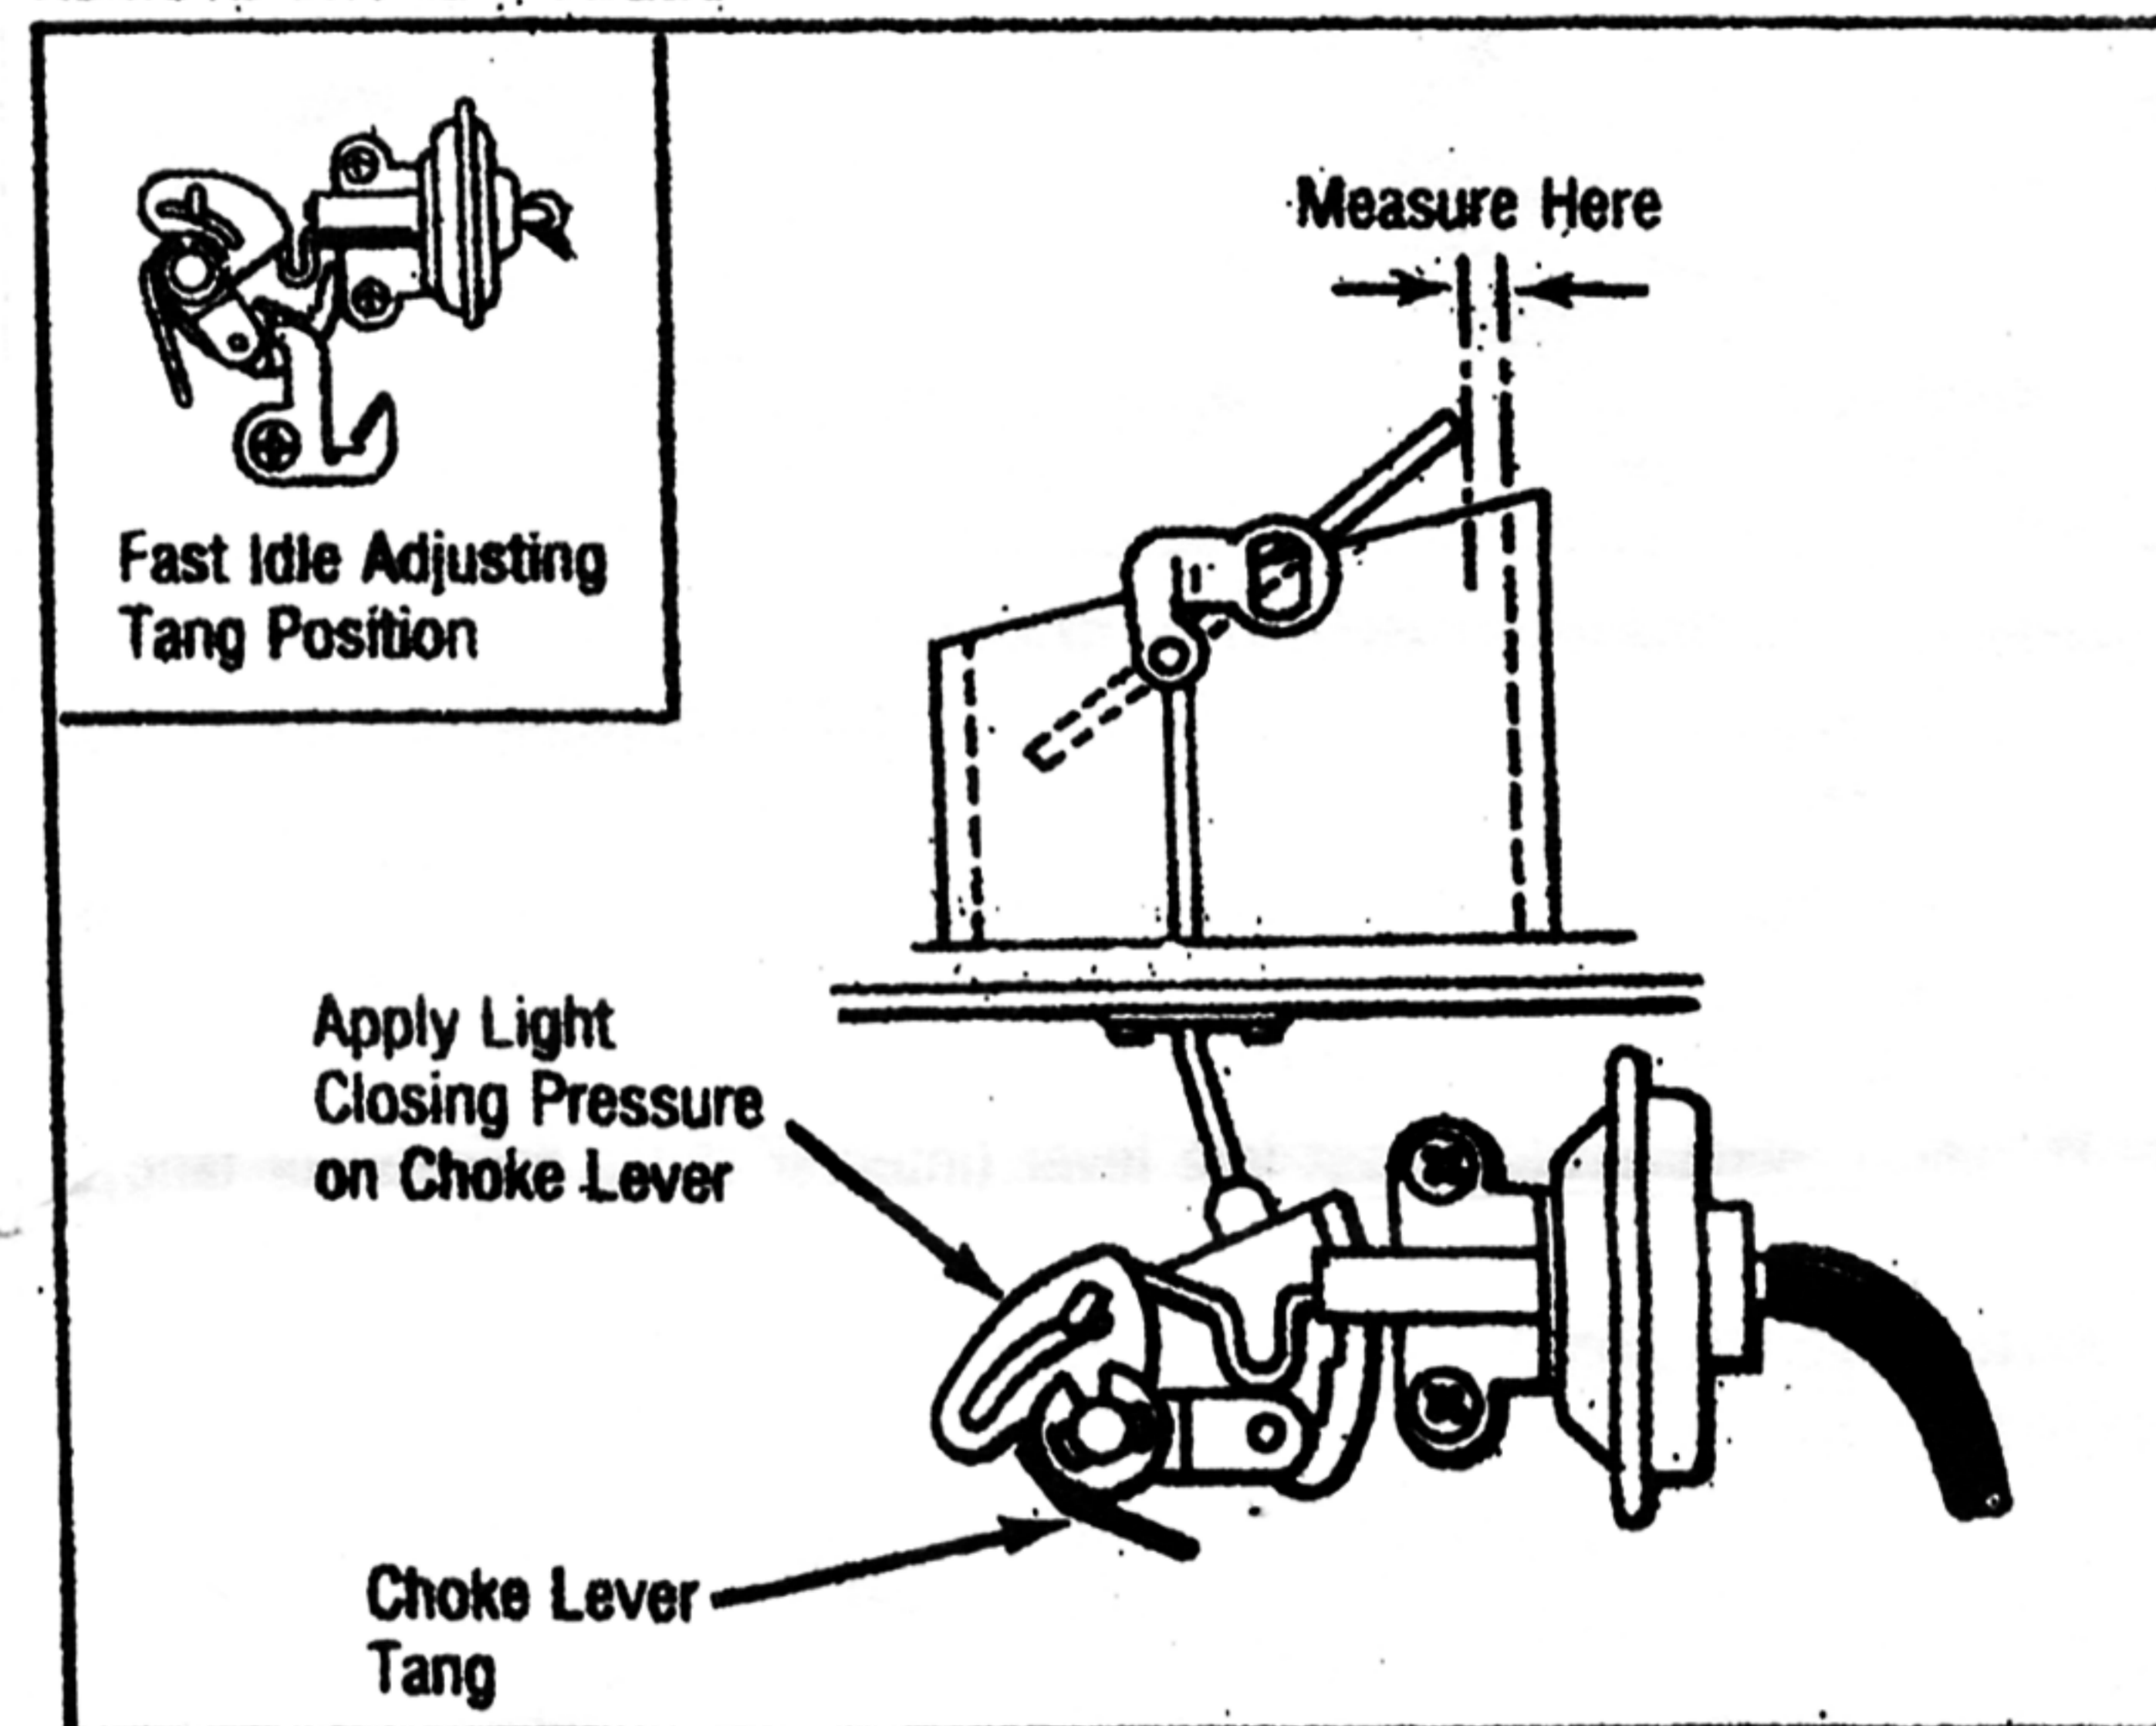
Fast Idle Cam Adjustment (Remote Choke Models)
